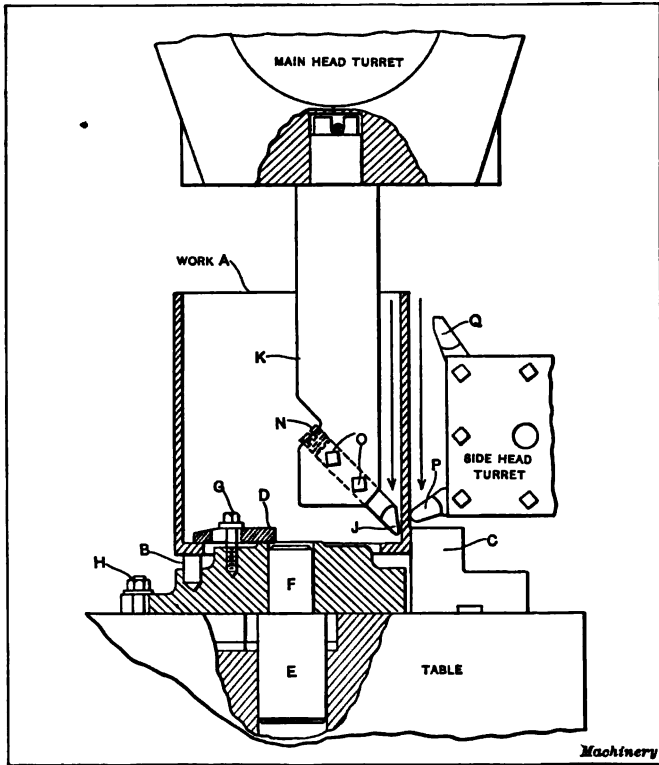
A Thin Cast-iron Shell finished all over in a Vertical Turret Lathe
